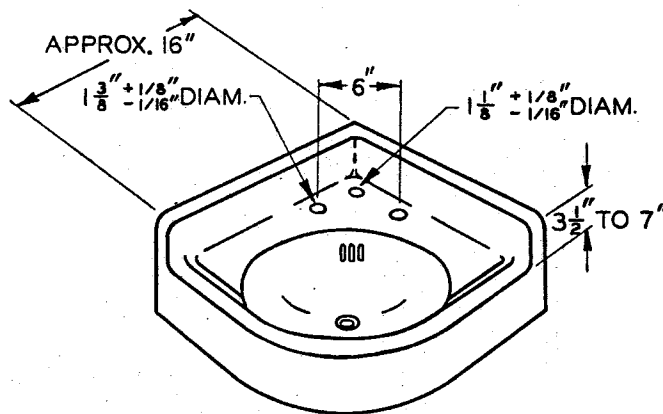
Apron corner lavatories with straight back. (Par. 4.2.5 (a).)
